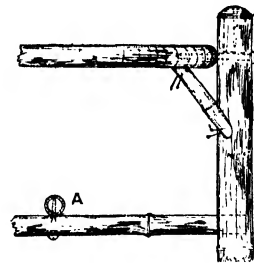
Side View of Bamboo Cake Stand, Handle Down.
